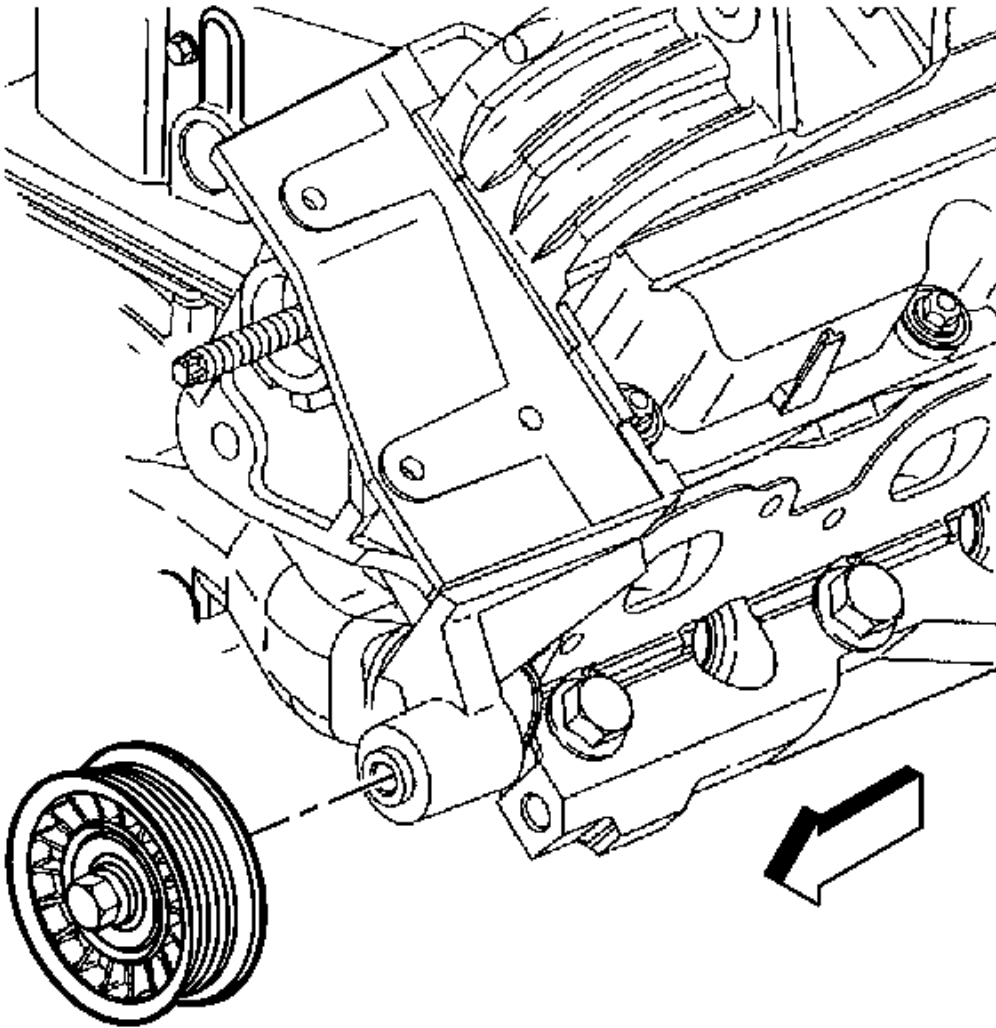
Installing Drive Belt Idler Pulley (L67)
